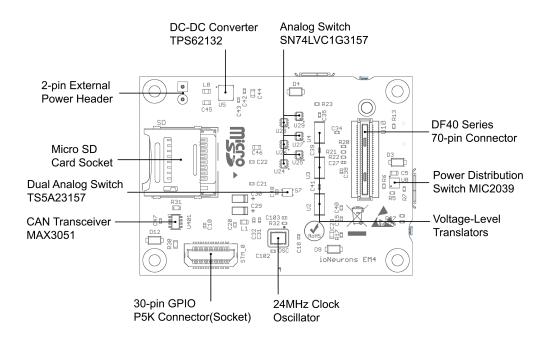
EM4 Board PCB and component diagram (bottom view)
